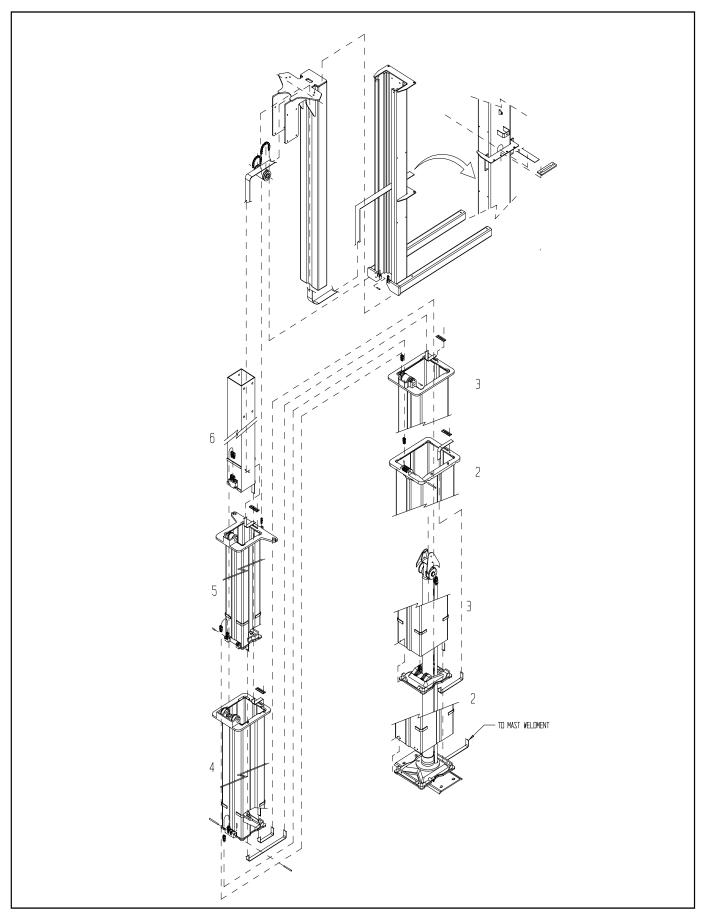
Mast Assembly, Strap and Chain Detail.
